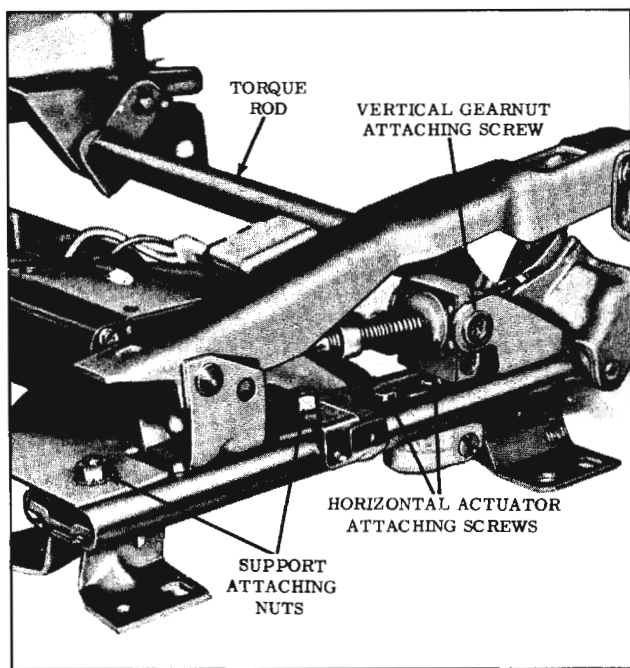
Bucket Seat Adjuster (Outboard)
